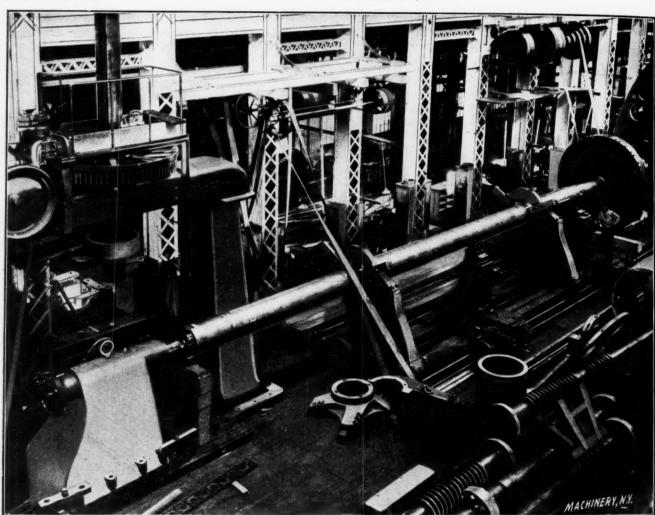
Turning 22-inch Tail Shaft for Steamship St. Paul, in 125-inch lathe. Tailstock set on base of Sellers 108-inch cylinder boring mill.
